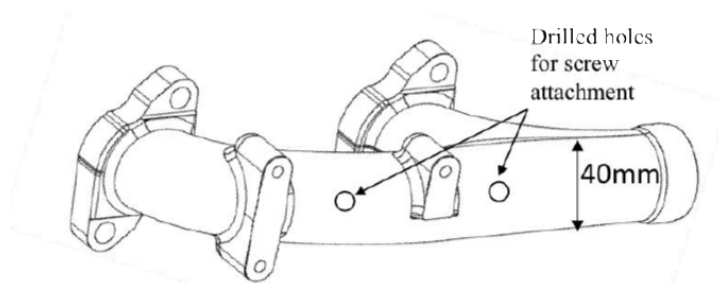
Exhaust manifold with threaded holes where TBC specimens can be placed and exposed to exhaust gases during an engine test [8].
